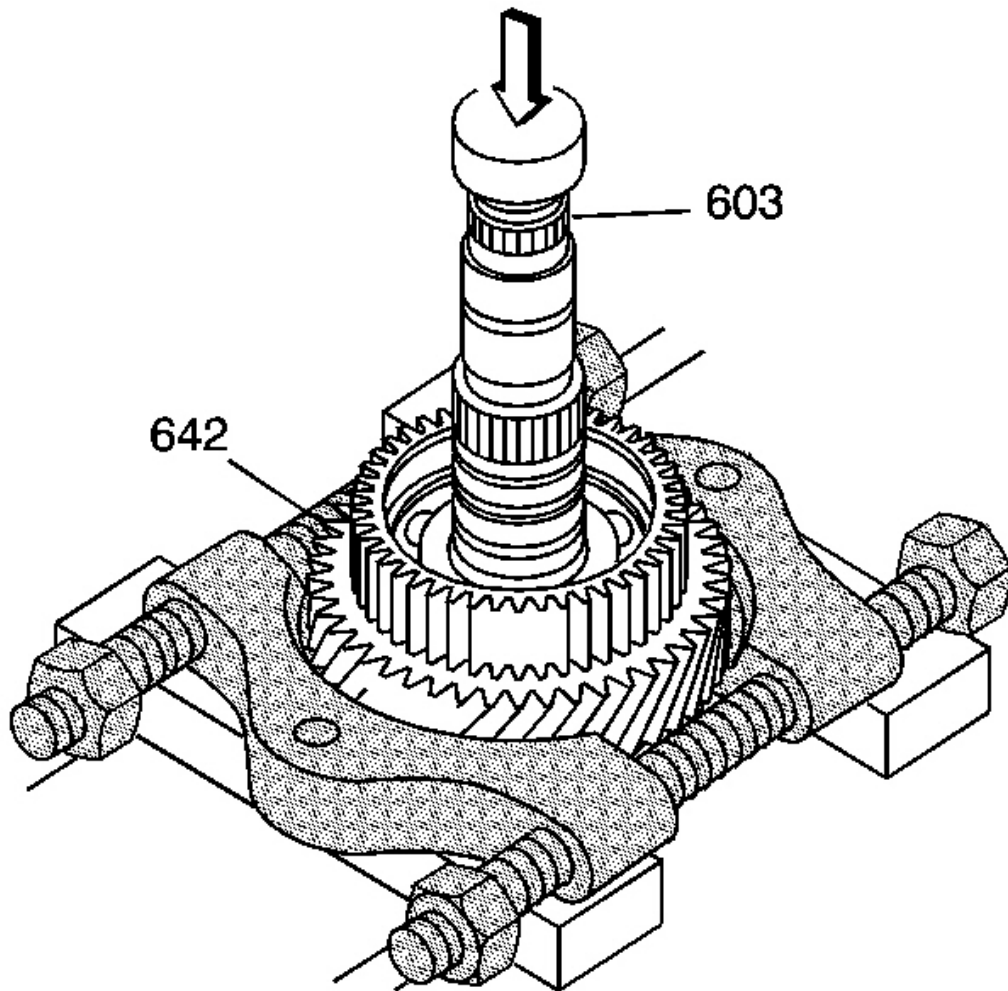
4th Drive Gear With Clutch Hub Assembly & Mainshaft
